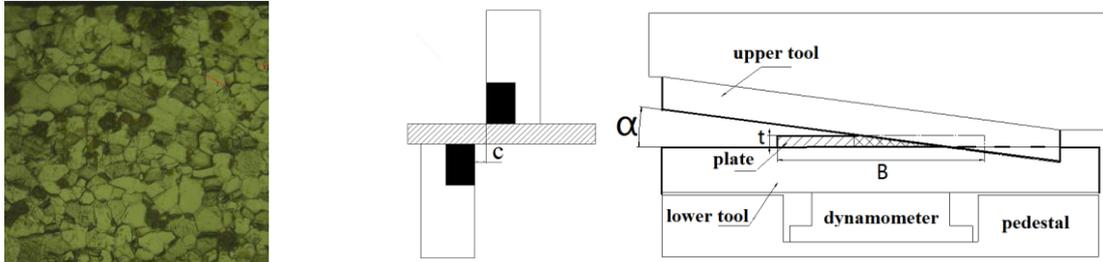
Microstructure of electrical steel Fig.2 Oblique shear principle:(A) Sectional view ;(b) Front view
